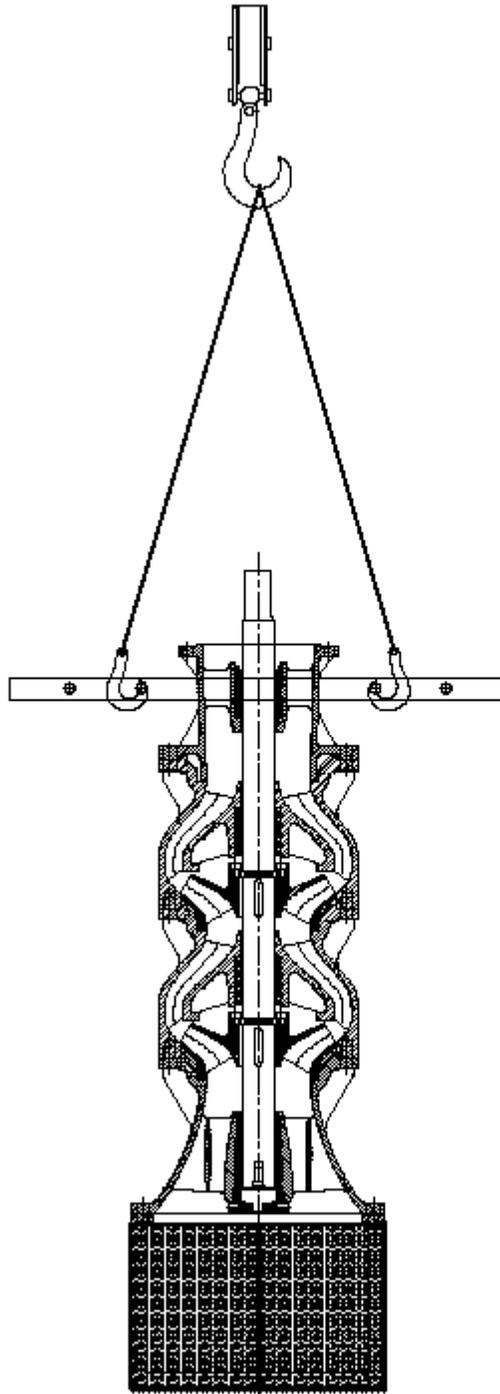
BOWL ASSEMBLY READY FOR INSTALLATION.
